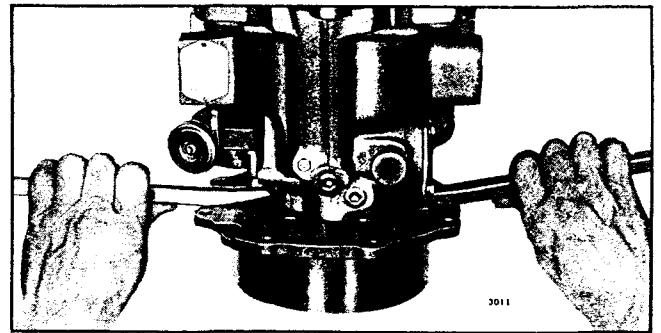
Removing Reduction Gear Input Gear and Bearing Assembly from Reverse Gear Housing (1.5:1)
